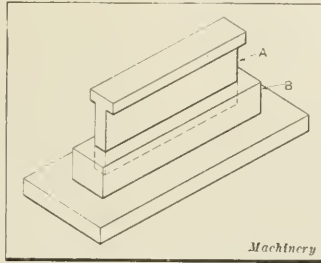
Mold used for compressing the Tungsten Powder into Slug Form
